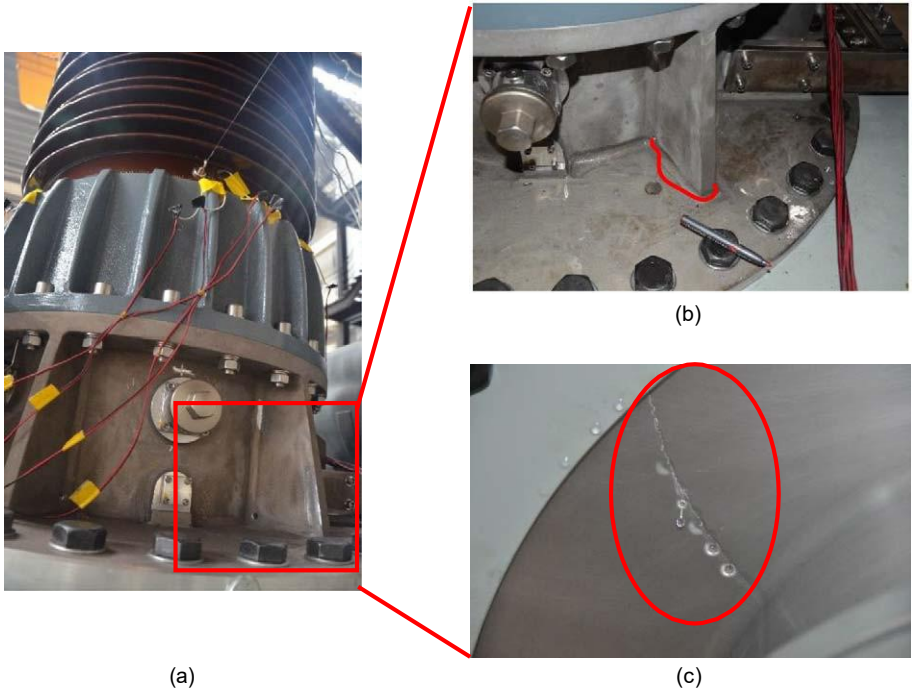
(a) Flange-O; (b) one crack at the top surface of the flange bottom plate; and (c) the same crack at the bottom surface of the flange bottom plate.
